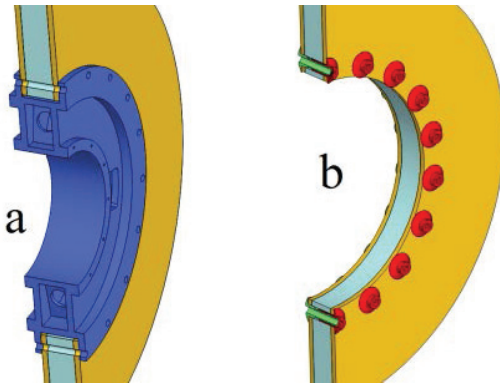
Cut view of sandwich panels with use of: (a) flange; (b) inserts.
